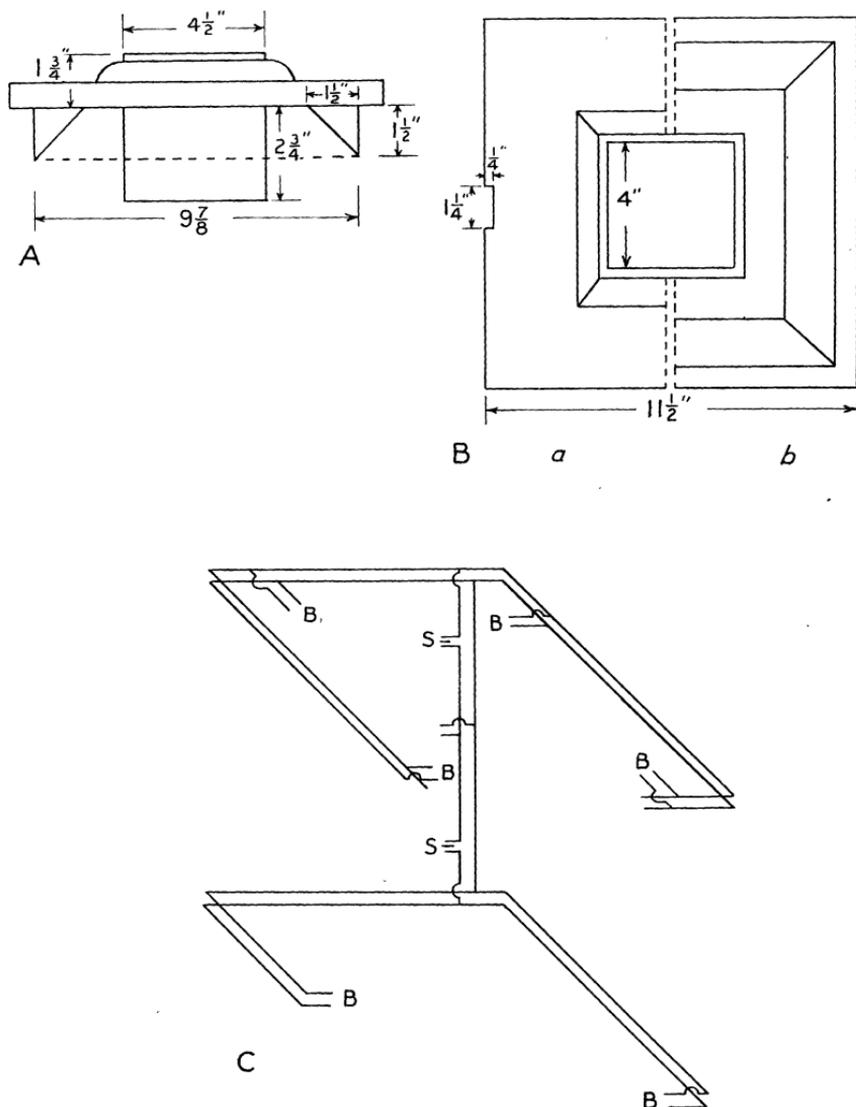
Detailed drawings showing the dimensions and construction of certain parts of the photographic light box, and the arrangement of the light bulbs: A, Cross-sectional view of the top; B, toppiece with upper side shown at *a* and lower side at *b*; C, diagram of wiring in which B stands for bulb and S for switch
